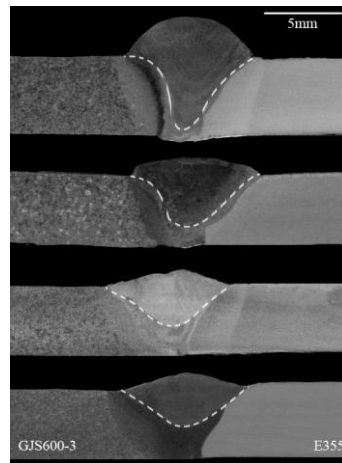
Macro inspection photographs of various joints in heat treated or as-weld conditions. The dashed curves on the weld metals show the boundary between first and second pass of welding.
